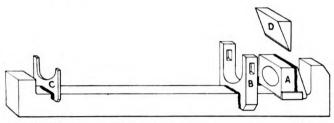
Special jig used in upsetting heated car axle end under a steam hammer
